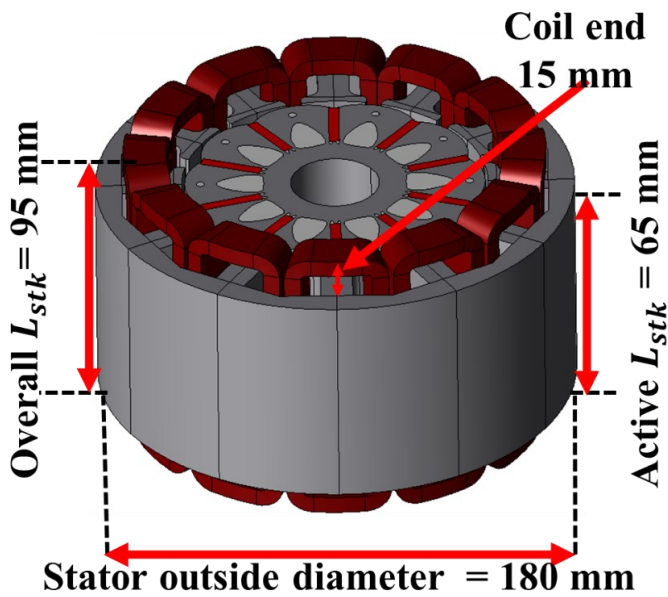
27. Design – 3 (Laminated steel with coil end winding)
